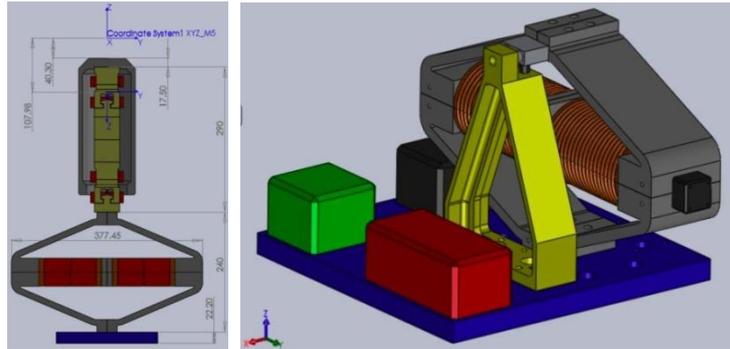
Actuator and flexure dimensions and the actuator line replaceable unit.
